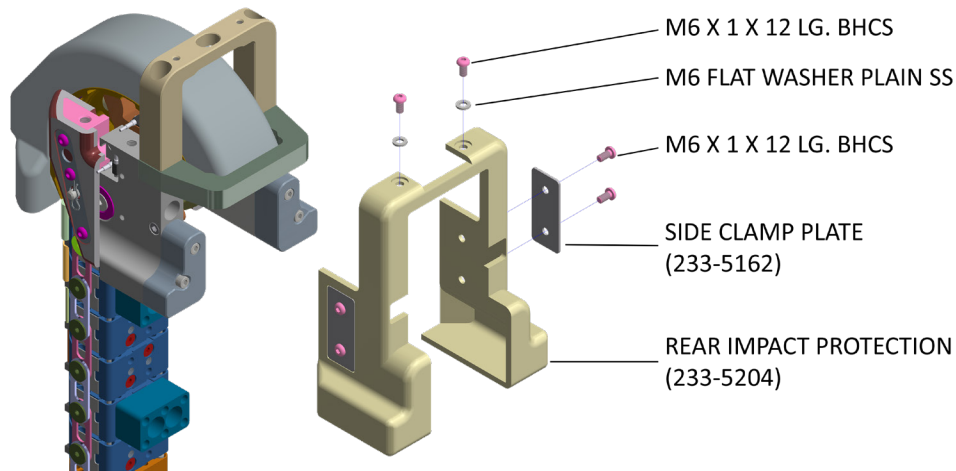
Remove the Side Clamp Plates and Rear Impact Protection
